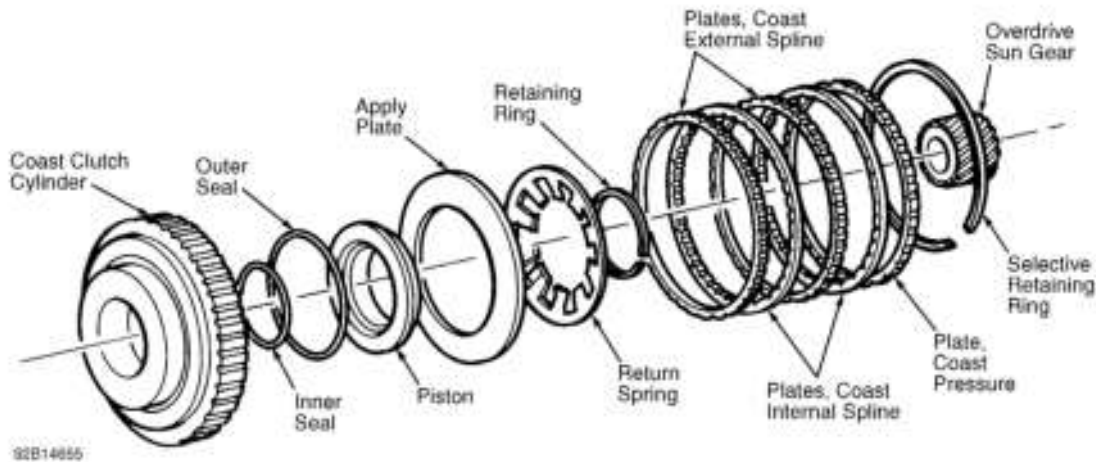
Exploded View Of Coast Clutch Cylinder Assembly
